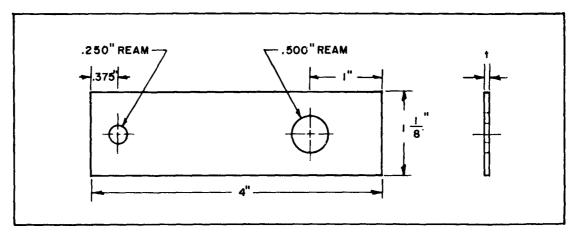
Sheet Bearing Test, Specimen-Bearing Ratio e/D = 1.5
